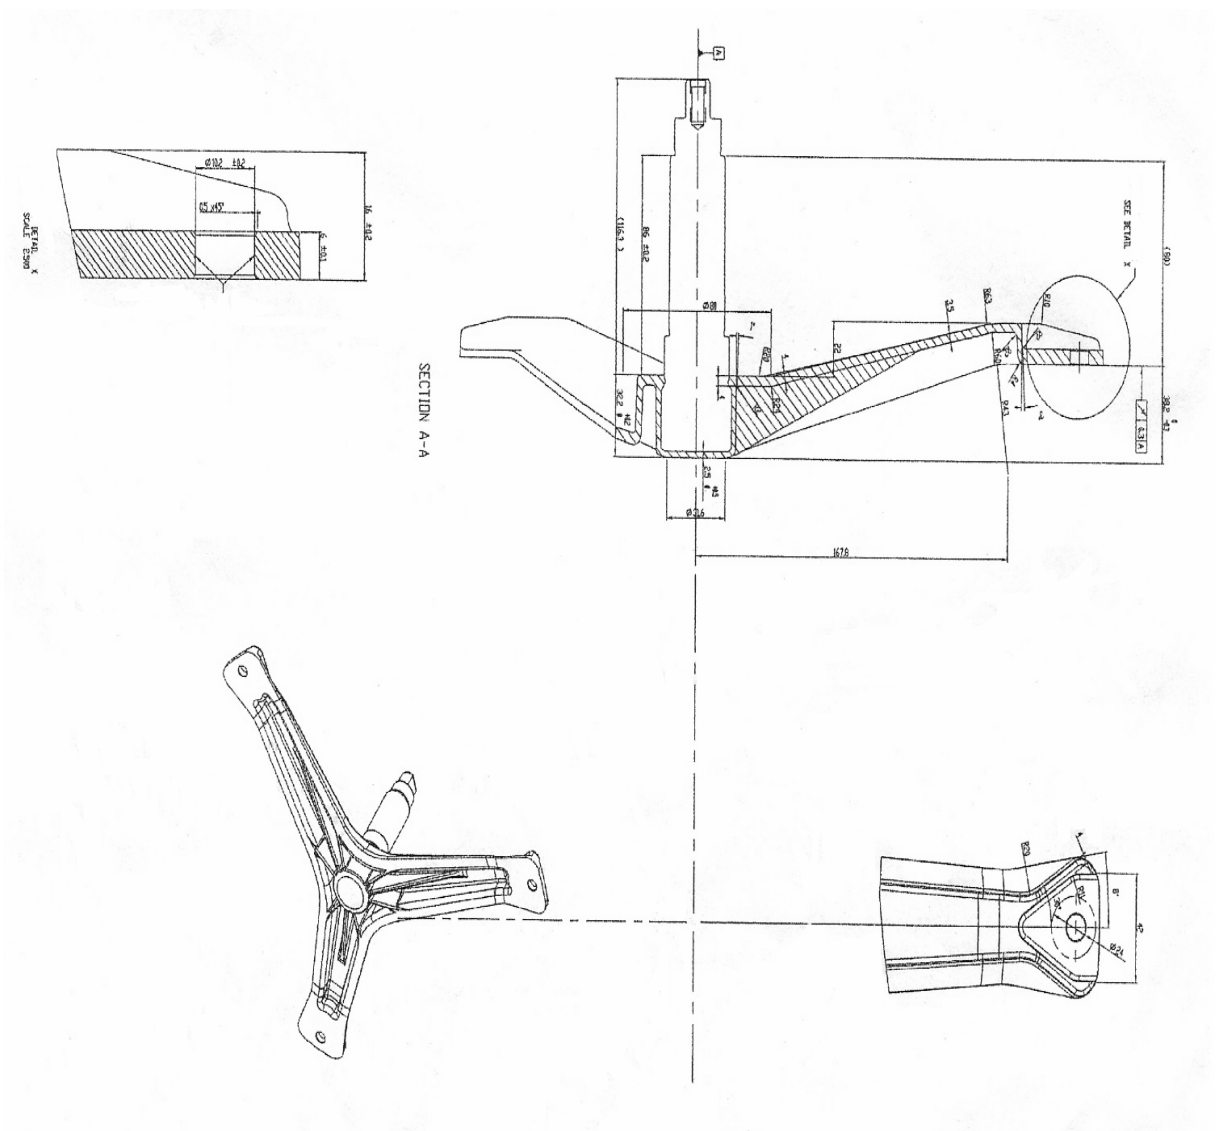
The shape of the flange designed using the Solidworks CAD software
